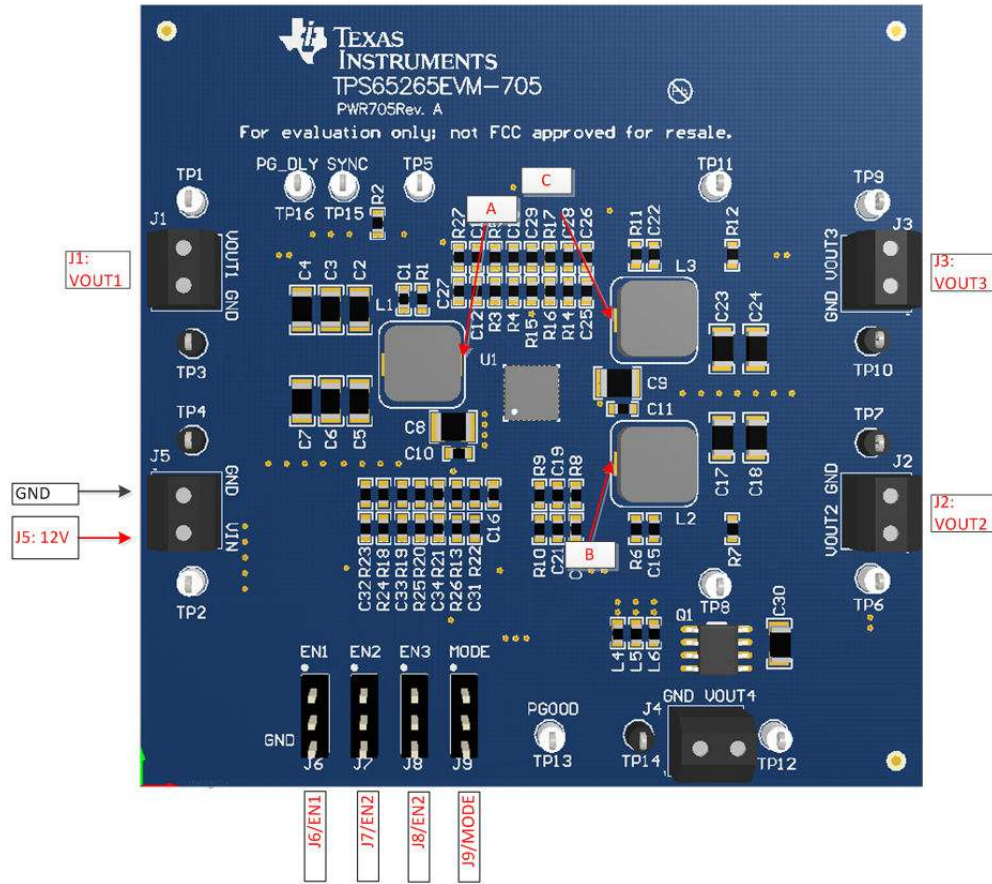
TPS65265EVM-705 Header Description and Jumper Placement
